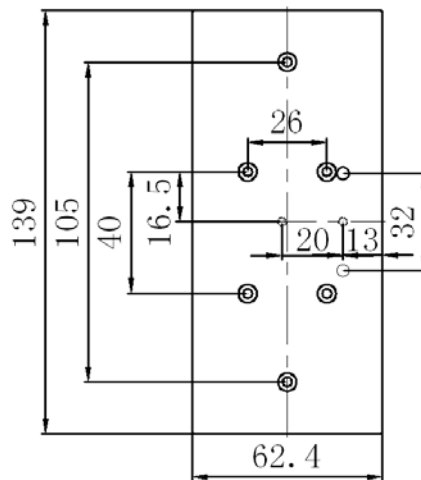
the Transitional Board Mounting Dimension (Unit: mm)
